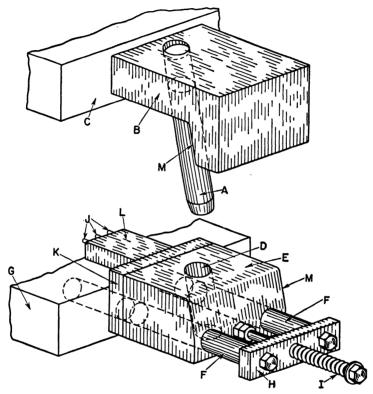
Pin-actuated core pull, which is a somewhat less complex device than the rack-and-pinion type.
